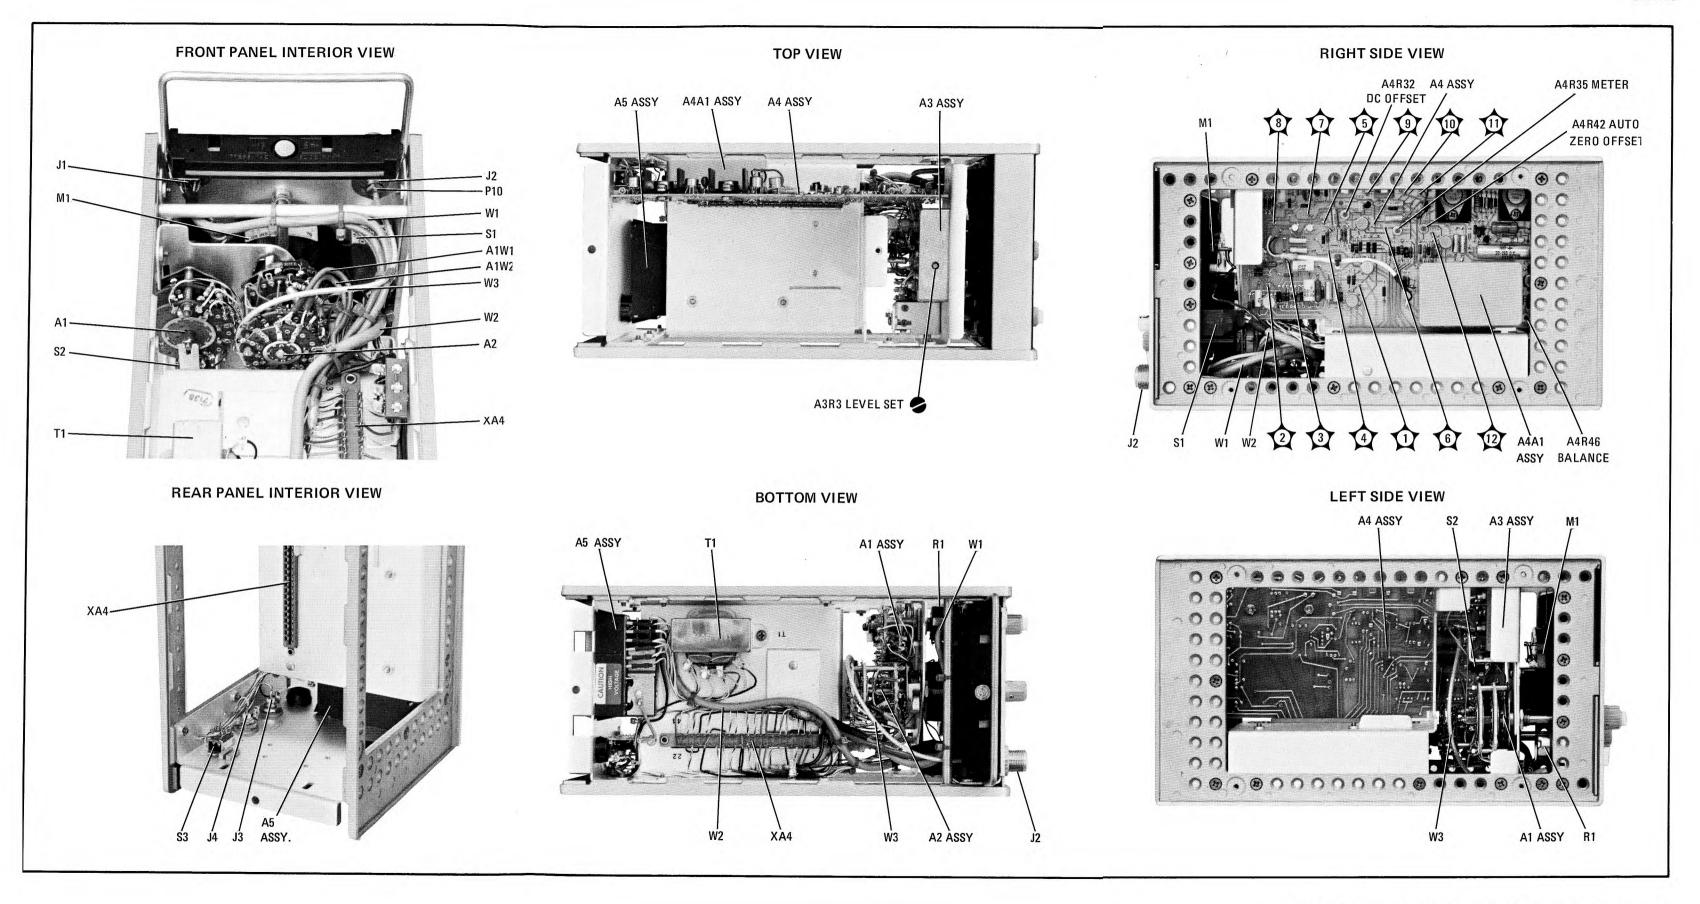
Assembly, Chassis and Adjustable Components, and Test Point Locations
